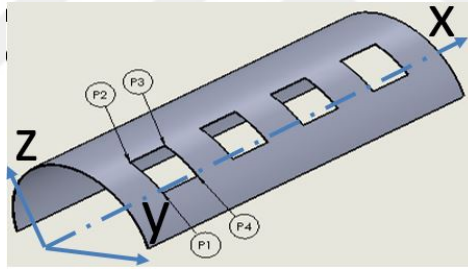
Drawing of Manufactured Cylindrical Aluminum Sheet
